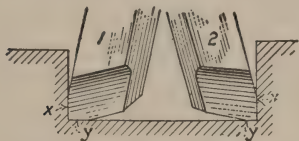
Tool bits for finishing square-shoulder cuts. Surfaces *x* and *y* are at an angle of 90 deg. or a trifle less.
